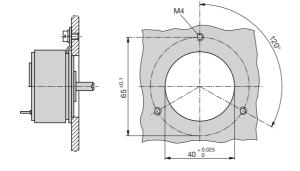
Drilling plan for fixing with 3 spring clamps.
